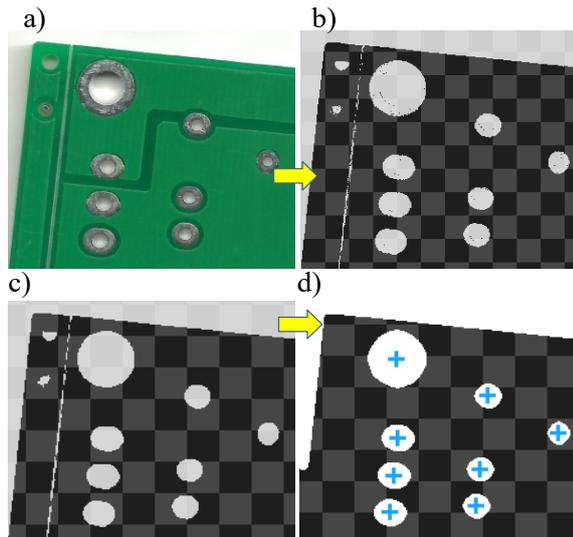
PCB images obtained during processing: a) PCB scan with holes diameters 1.5 mm on the white background; b) after application of smoothing and threshold; c) after Close Region, Gauss, Erode and Dilate filters; d) output image.
